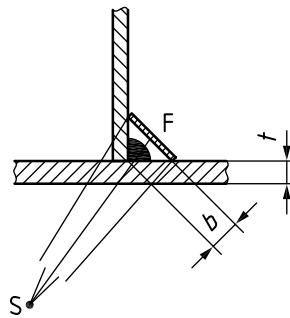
Arrangement for testing of fillet welds with a perpendicular film position
